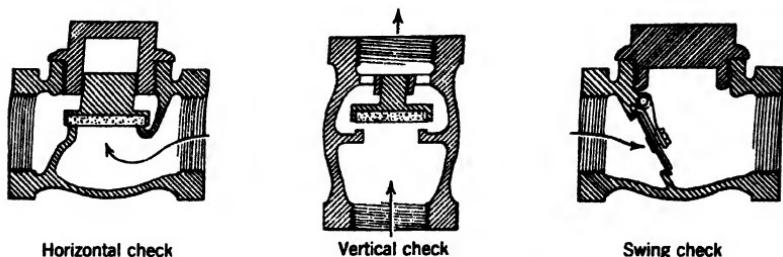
Cross sections of three types of check valves. Available with or without spring-operated checks.
